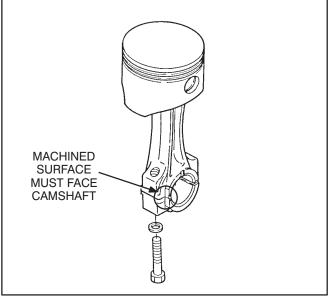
CONNECTING ROD AND CAP ALIGN-MENT
